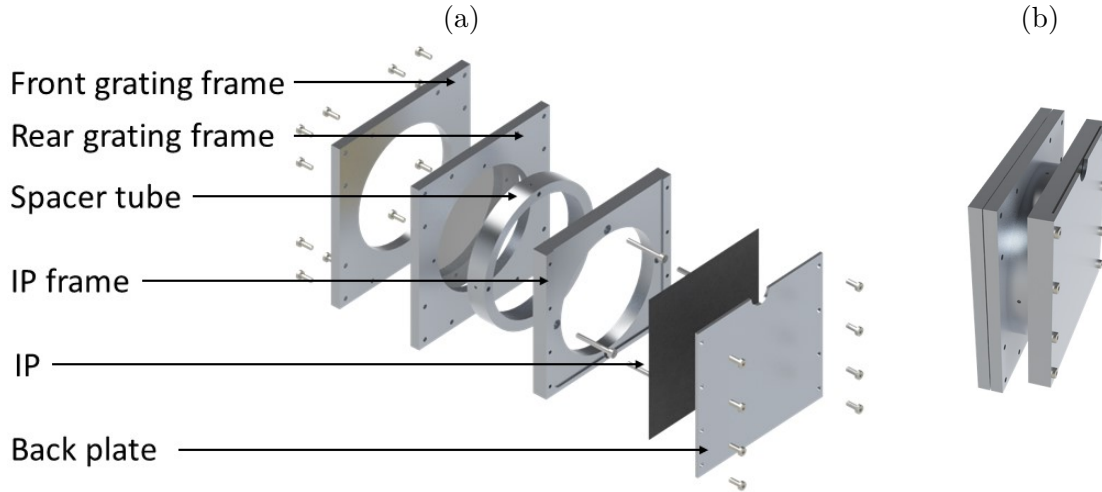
(a) Expansion view of a possible improved IP holder. (b) Render of the assembled view of the improved IP holder.
